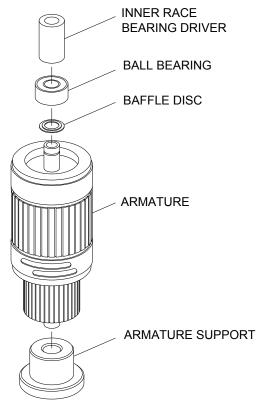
Installing Baffle Disc and Ball Bearing on the Armature Shaft
